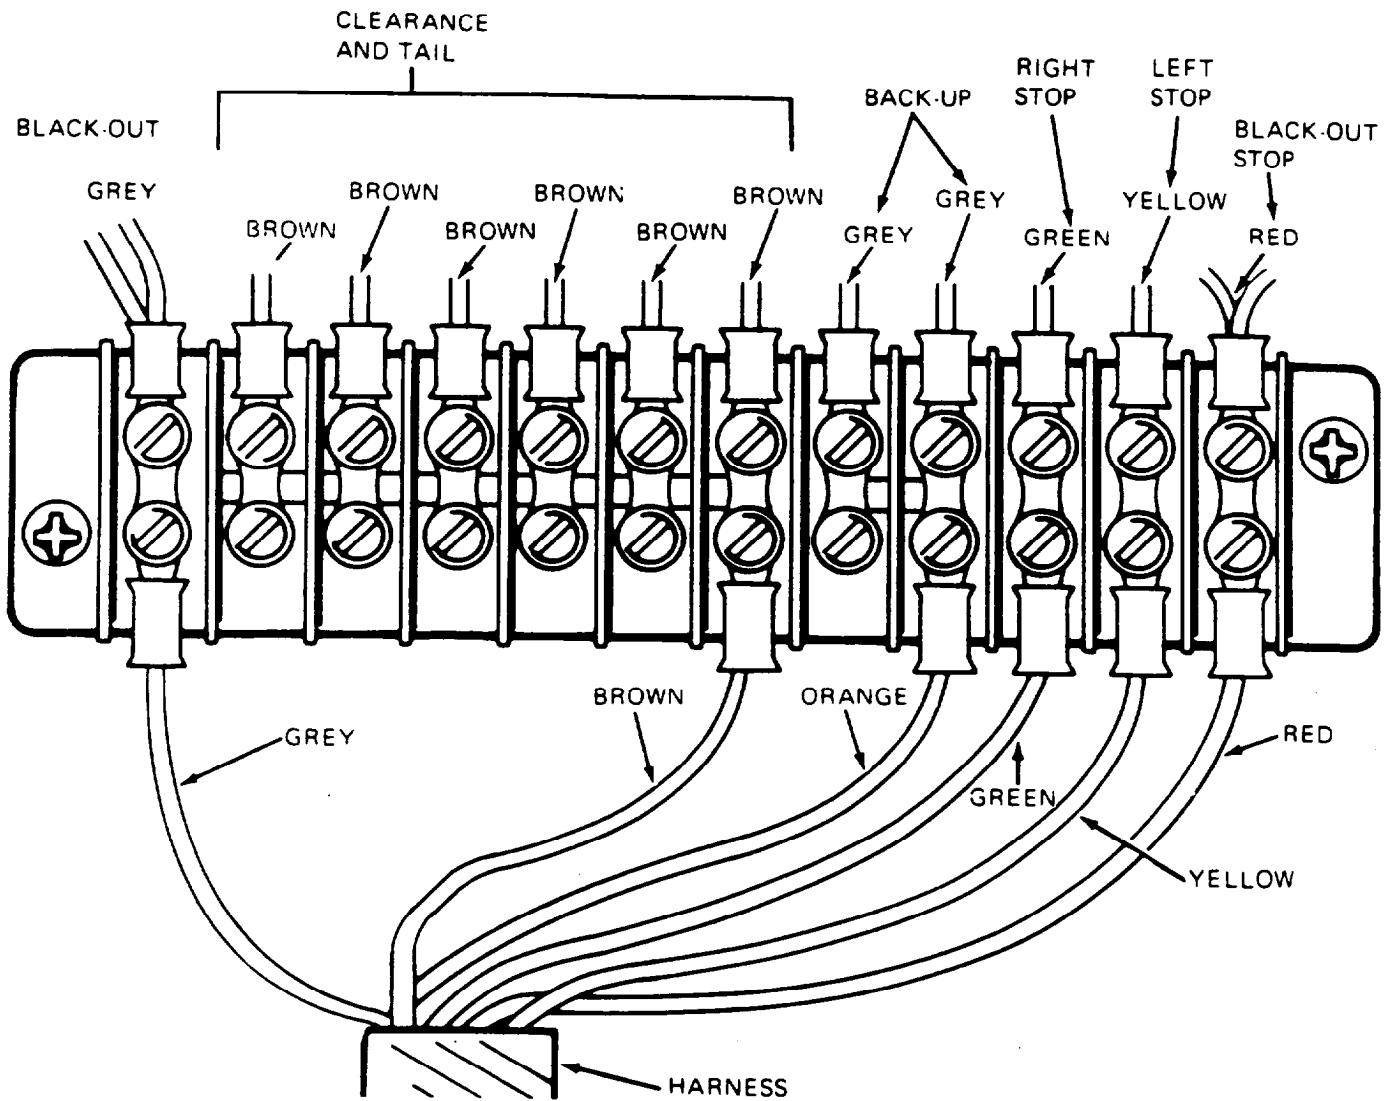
1. Remove/Install Loom Bumper and Marker Lamps (Sheet 2 of 2).
